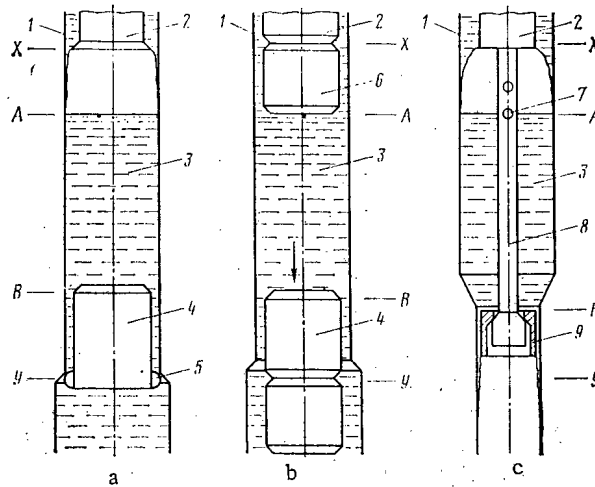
Designs of liquid RU with (a) a lower expeller, (b) lower and upper expellers, and (c) a throttle on a rod: 1) channel, 2) rod, 3) water column, 4) lower expeller, 5) stroke limiter, 6) upper expeller, 7) aperture, 8) tubular rod, and 9) throttle.
